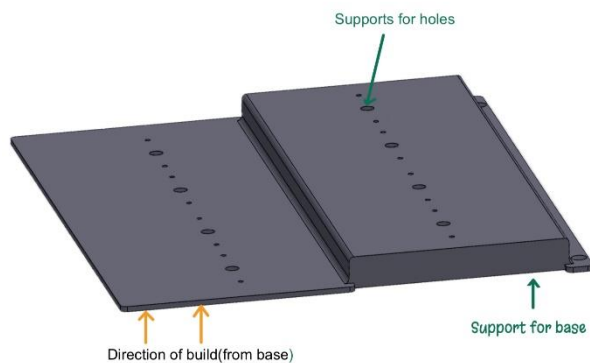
Isometric view of the part highlighting the direction of printing and holes that need to be supported.
